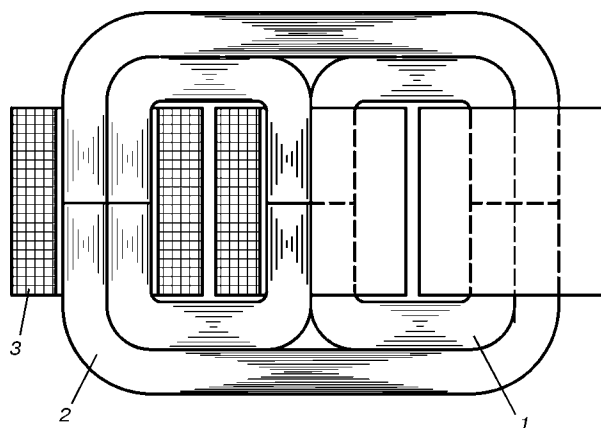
Traditional design of three-phase transformer with a tape multicore magnetic circuit: 1, 2 — tape core-type magnetic circuits; 3 — coil with windings
